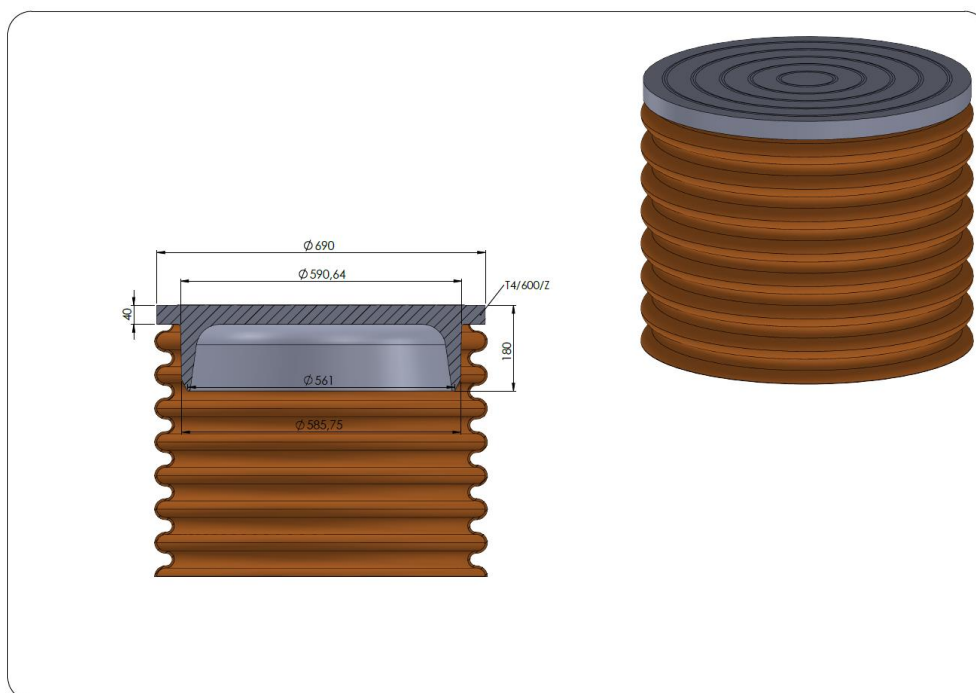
Protective cover without seal (recommended elevation 8 cm above ground level)
